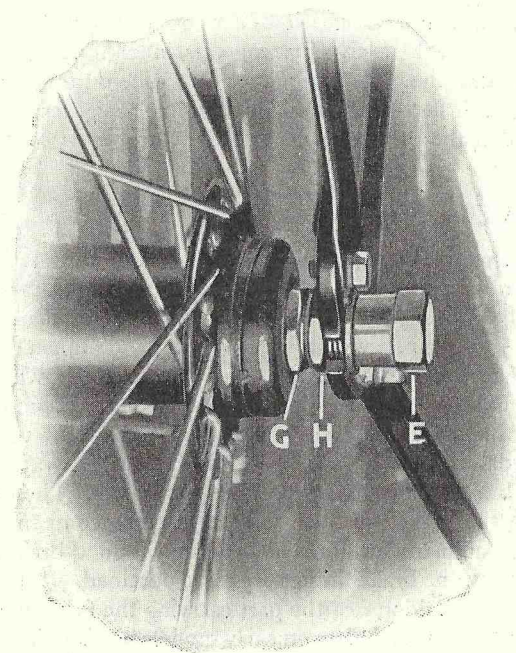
WHEEL-BEARING ADJUSTMENT.
